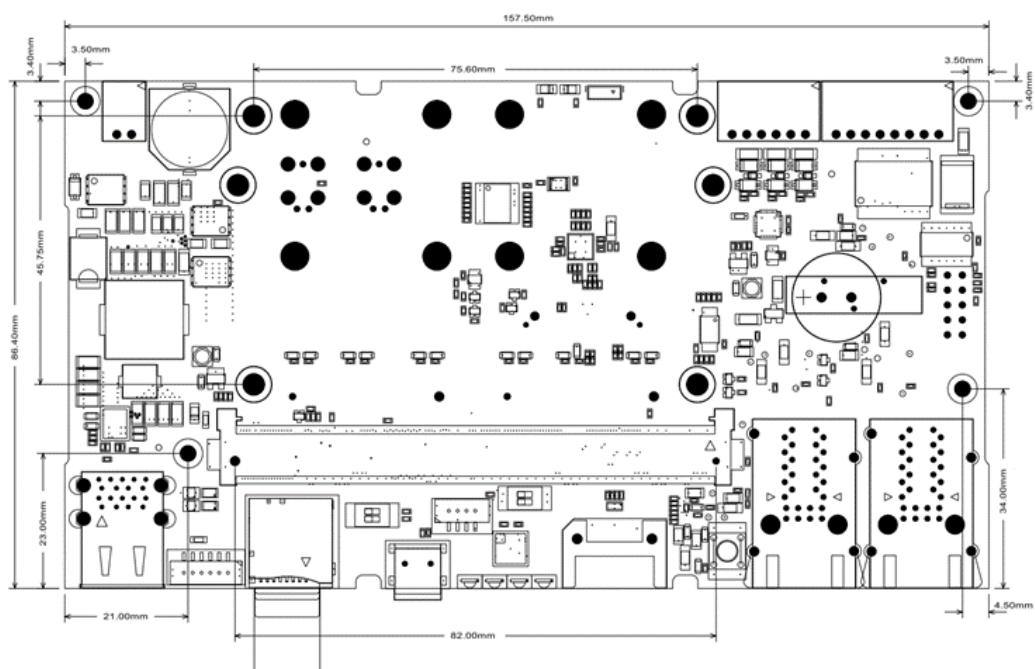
SBC-LS1088A Mechanical Dimensions
